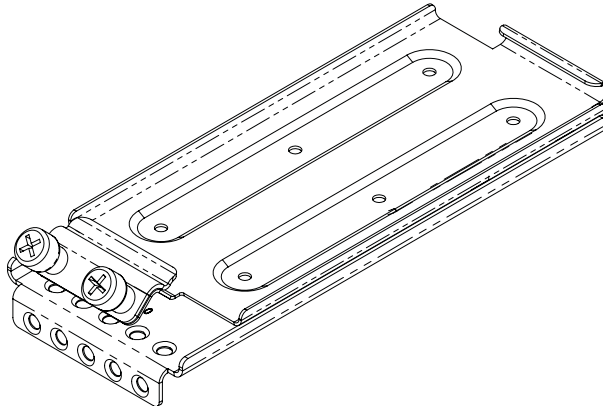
GDC 74A Unit Rack w/Adapter Plate
